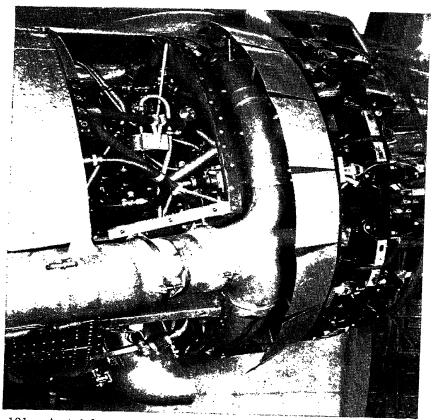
A stainless-steel exhaust collector ring on a Wright-engine installation of a Douglas DC-3. This also shows the accessory section of the enginemount assembly.
